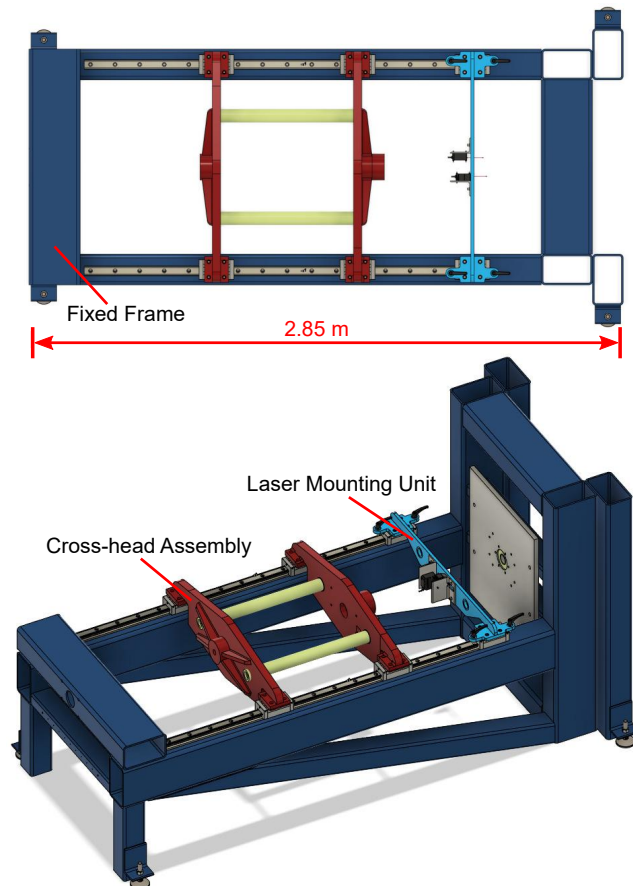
Heavy-duty fixed frame and movable parts of the equipment. The *Cross-head Assembly* and the *Laser Mounting Unit* move independently across the rails.
